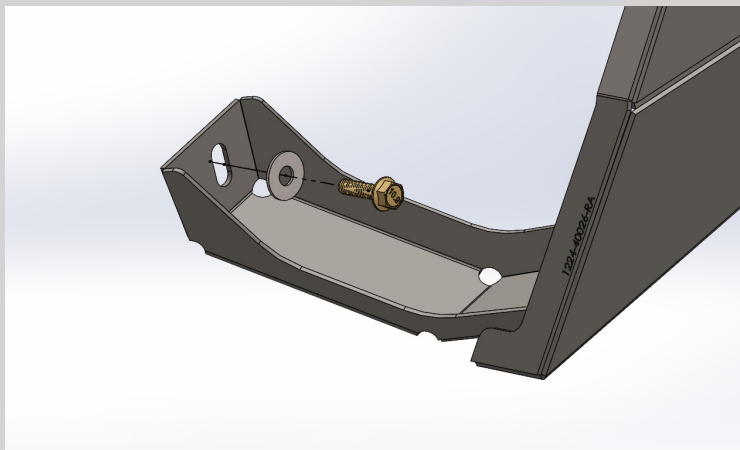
Factory M8 bolt and 3/8" washer securing front support bracket to frame.
